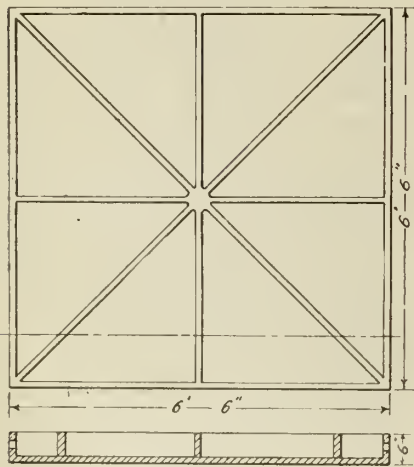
HALF SECTION OF MARKING OUT TABLE.
